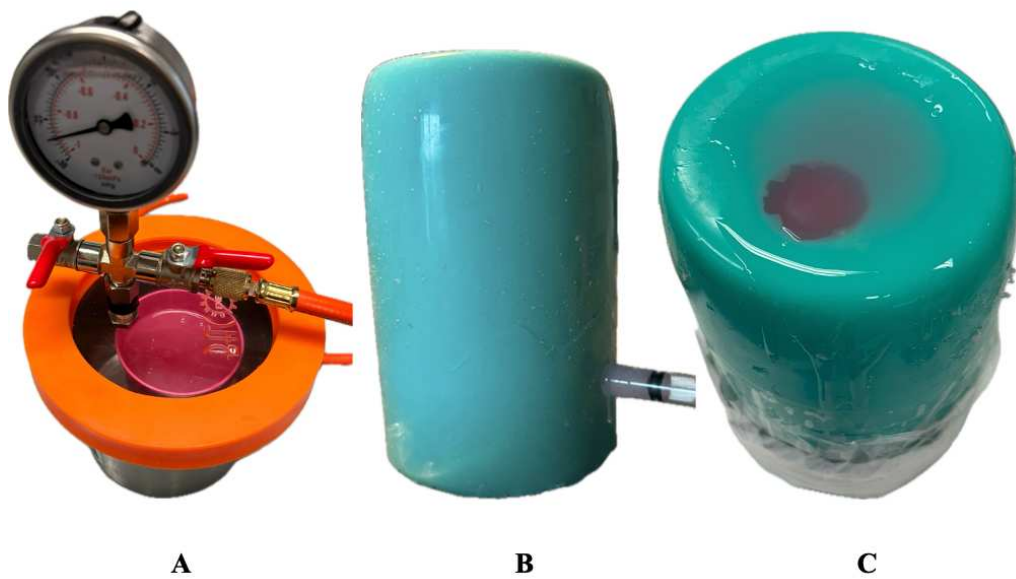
| (A) degassing phase of Ecoflex™ silicone with vacuum machine; (B) injection with syringe of Ecoflex™ silicone inside the mold; (C) mold filled with Ecoflex™ silicone.
